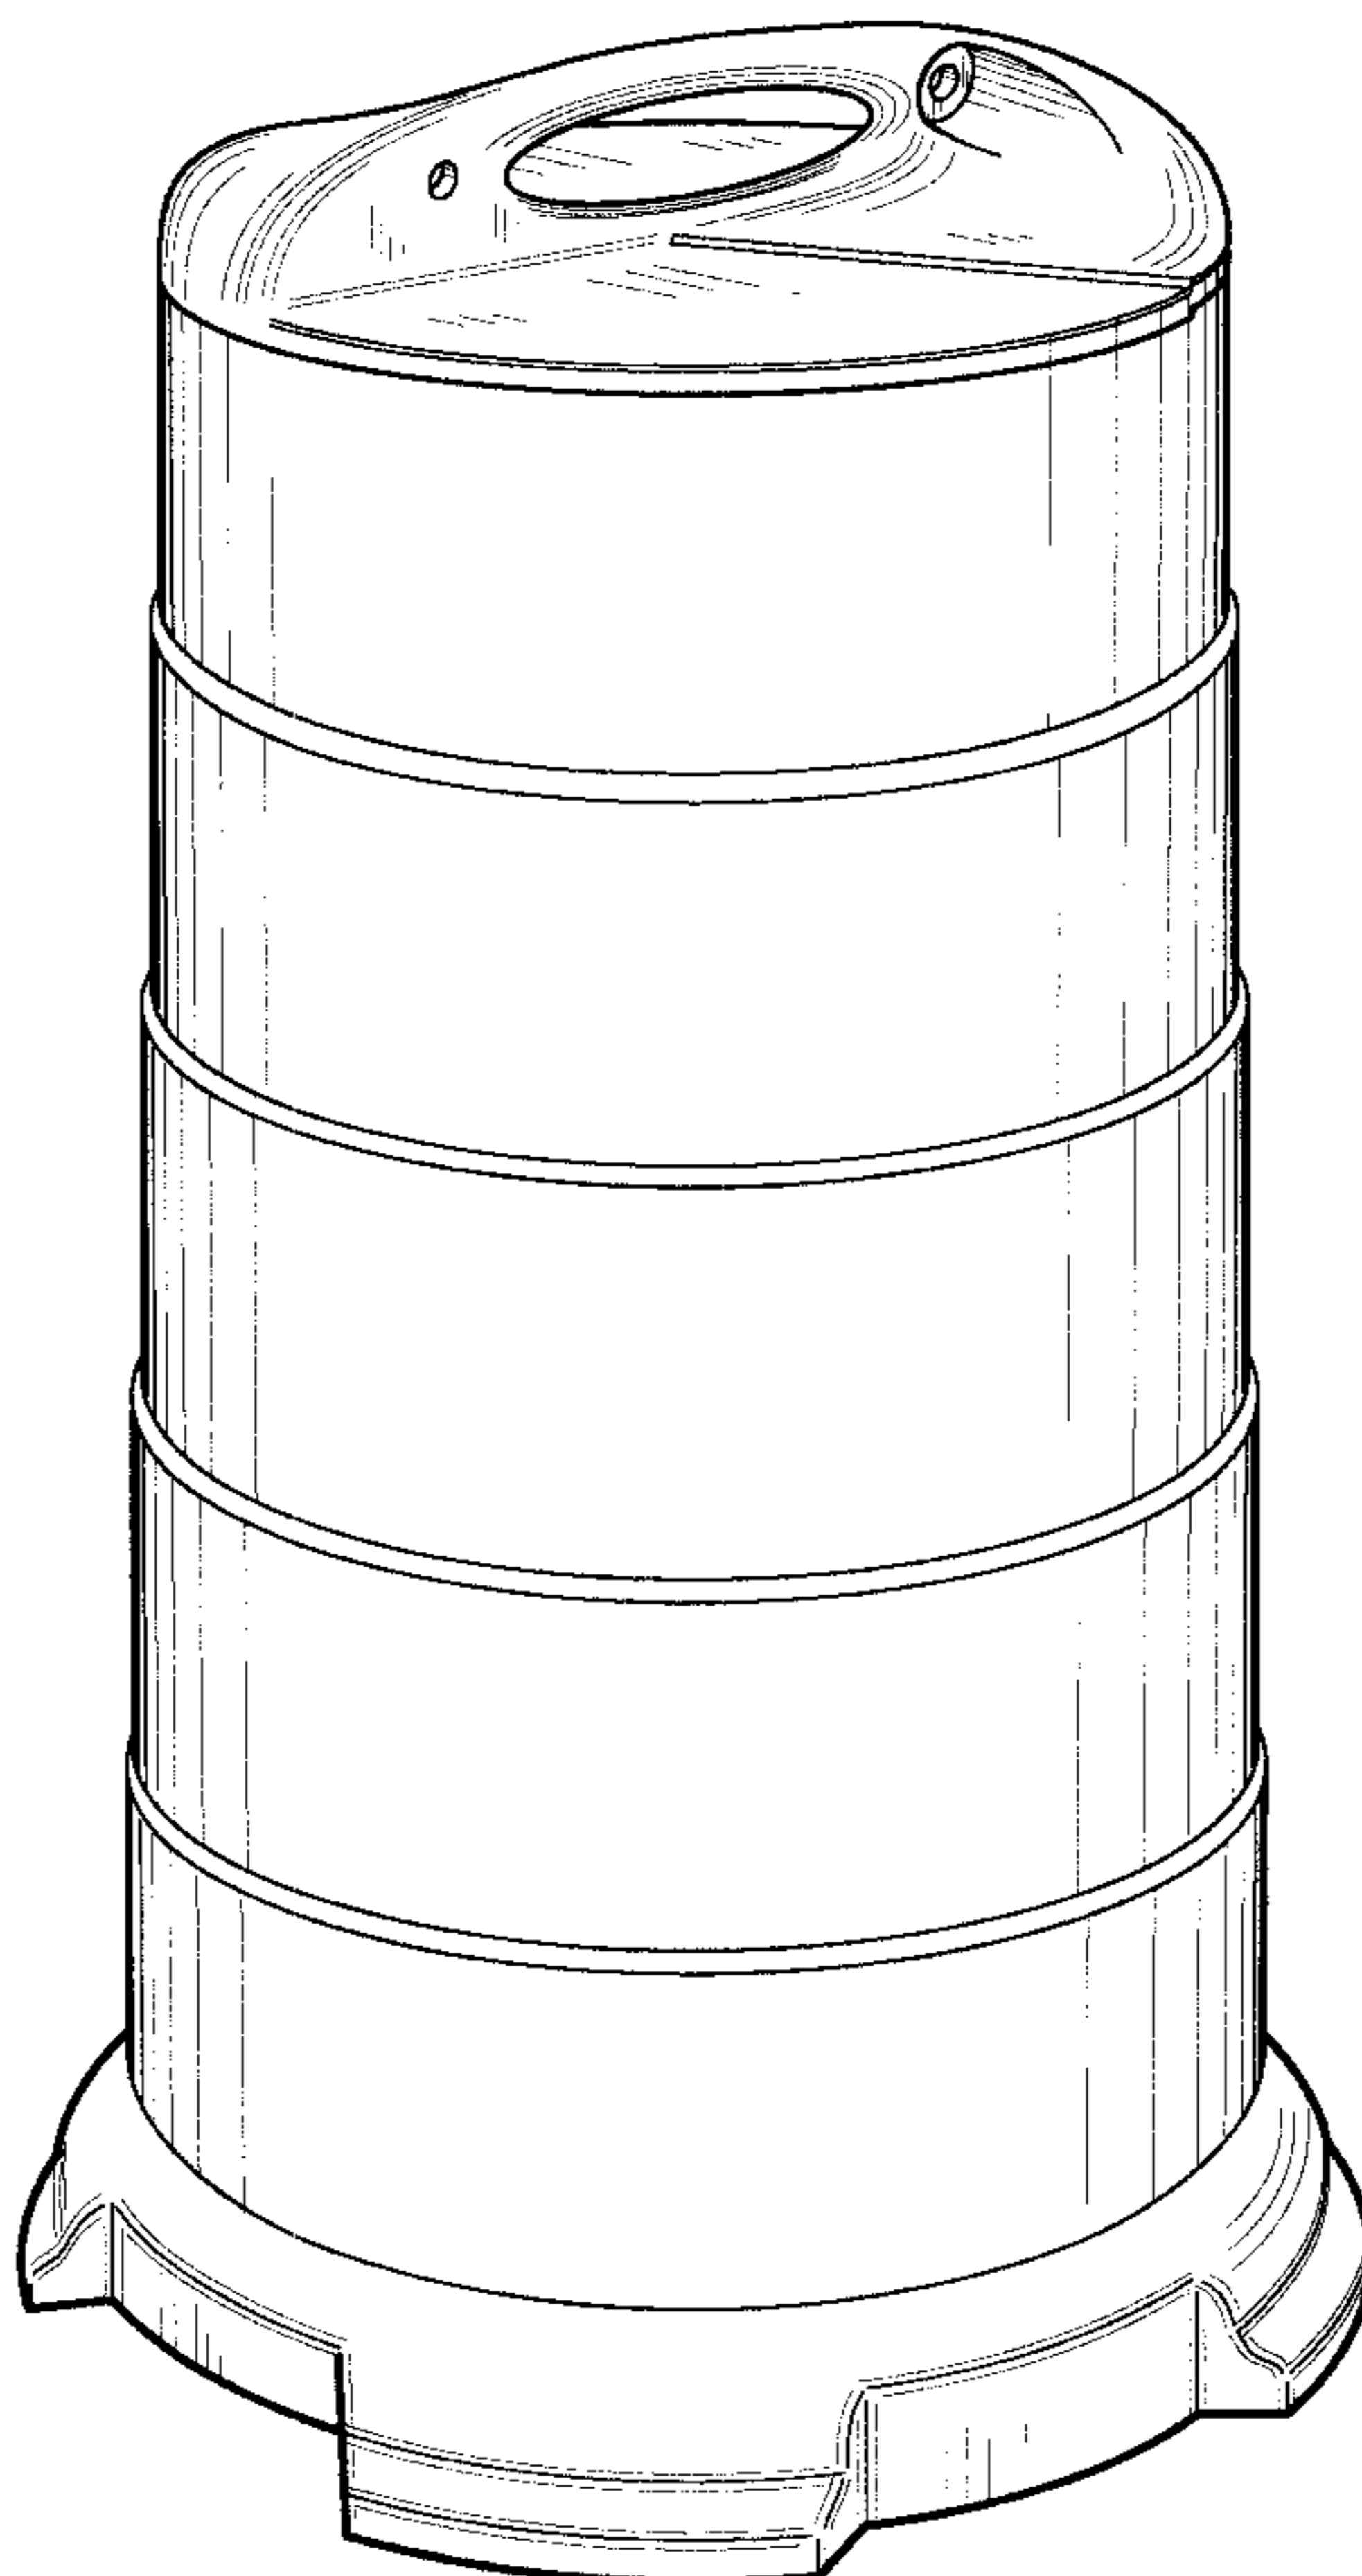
is a perspective view of a channelizer drum and handle showing my new design.
